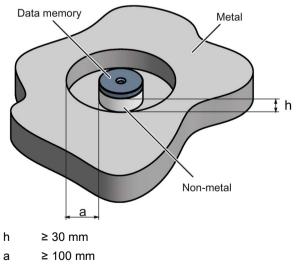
Flush-mounting of the MDS D139/D339 in metal with spacer
